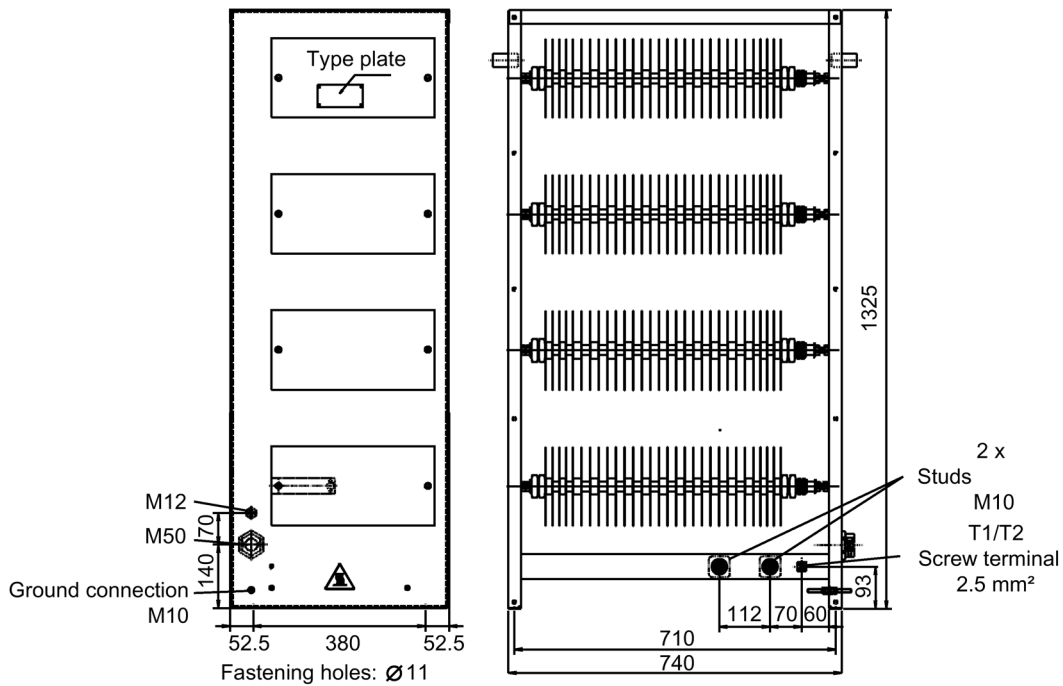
Dimension drawing for braking resistor (50 kW)
